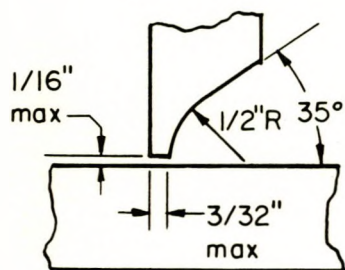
TYPICAL JOINT DESIGNS FOR GAS-SHIELDED METAL-ARC WELDING
